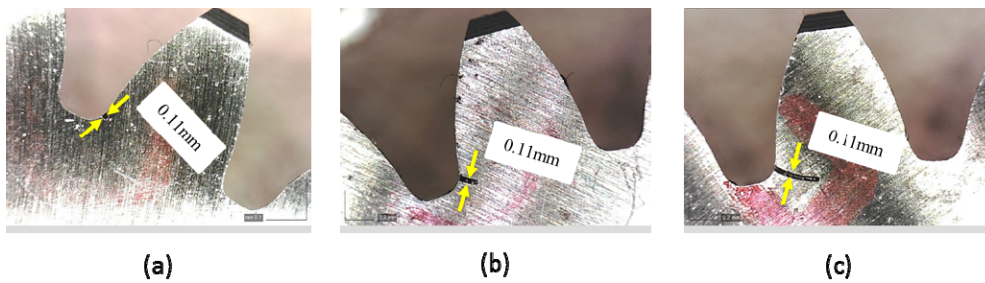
Three levels of artificial crack of planet gears
